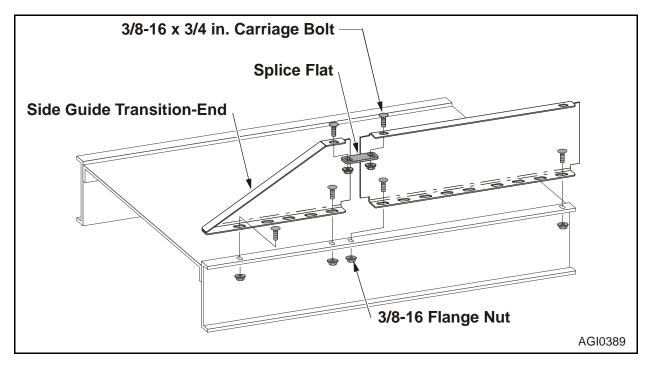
76 Direct-Mounting Side Guide Transition - Ends
